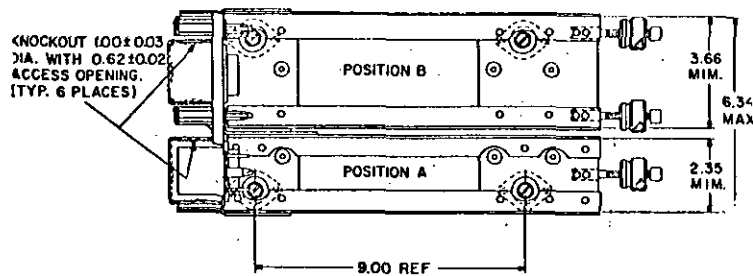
Mounting, MT-2248/ARC-84, Outline Dimensions
